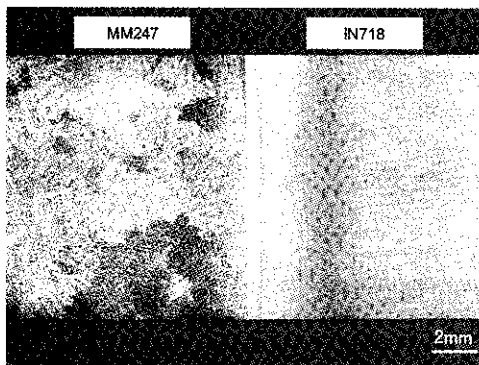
Observed Image of Friction Welded Specimen.
